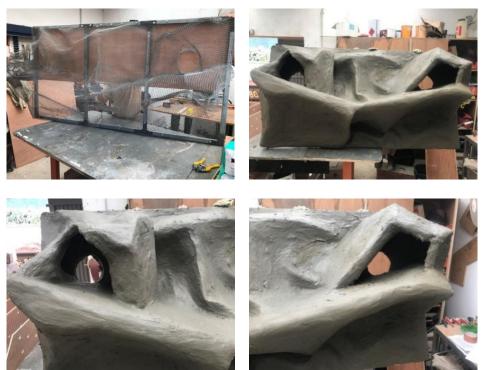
Manufacturing the visual insulation of nests, imitating rocky walls and providing a platform for the entrance and exit of the macaws (Photos: Loro Parque Fundación).
